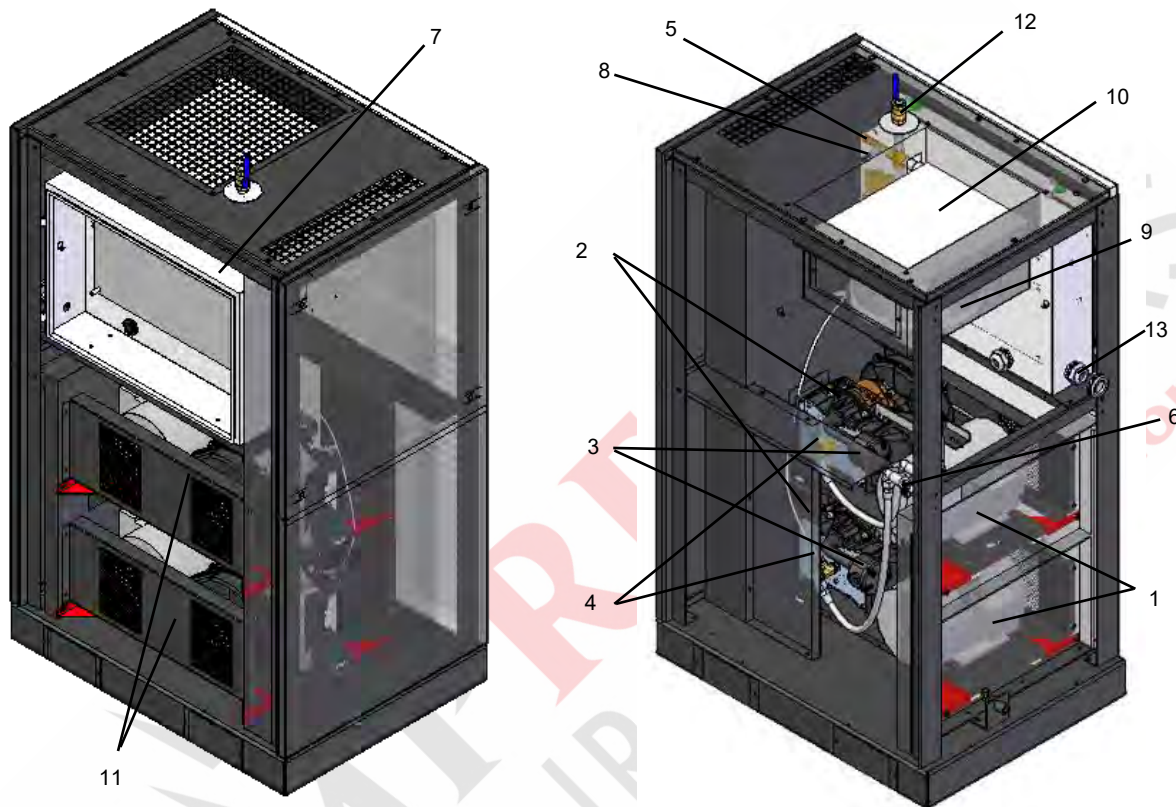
Overview of the assemblies:oil-free scroll compressor 8kW
